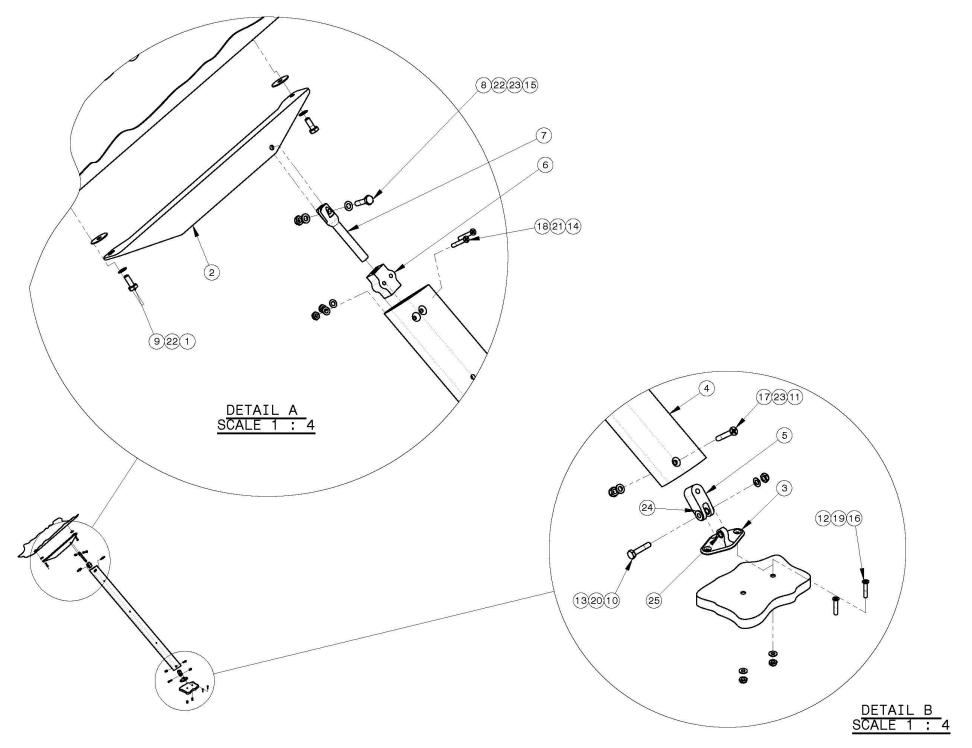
Parts Listings for Boarding Step Strut Assemblies, 56-15310-L and 56-15310-R (Page 1 of 2)
